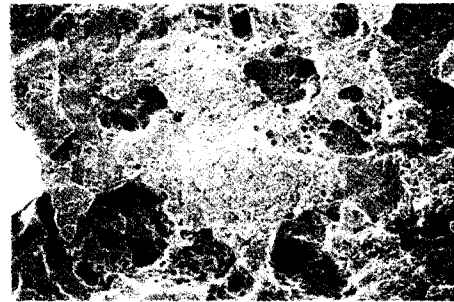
Fractured surface of weld produced under heat input rate of 230kW (x500).
